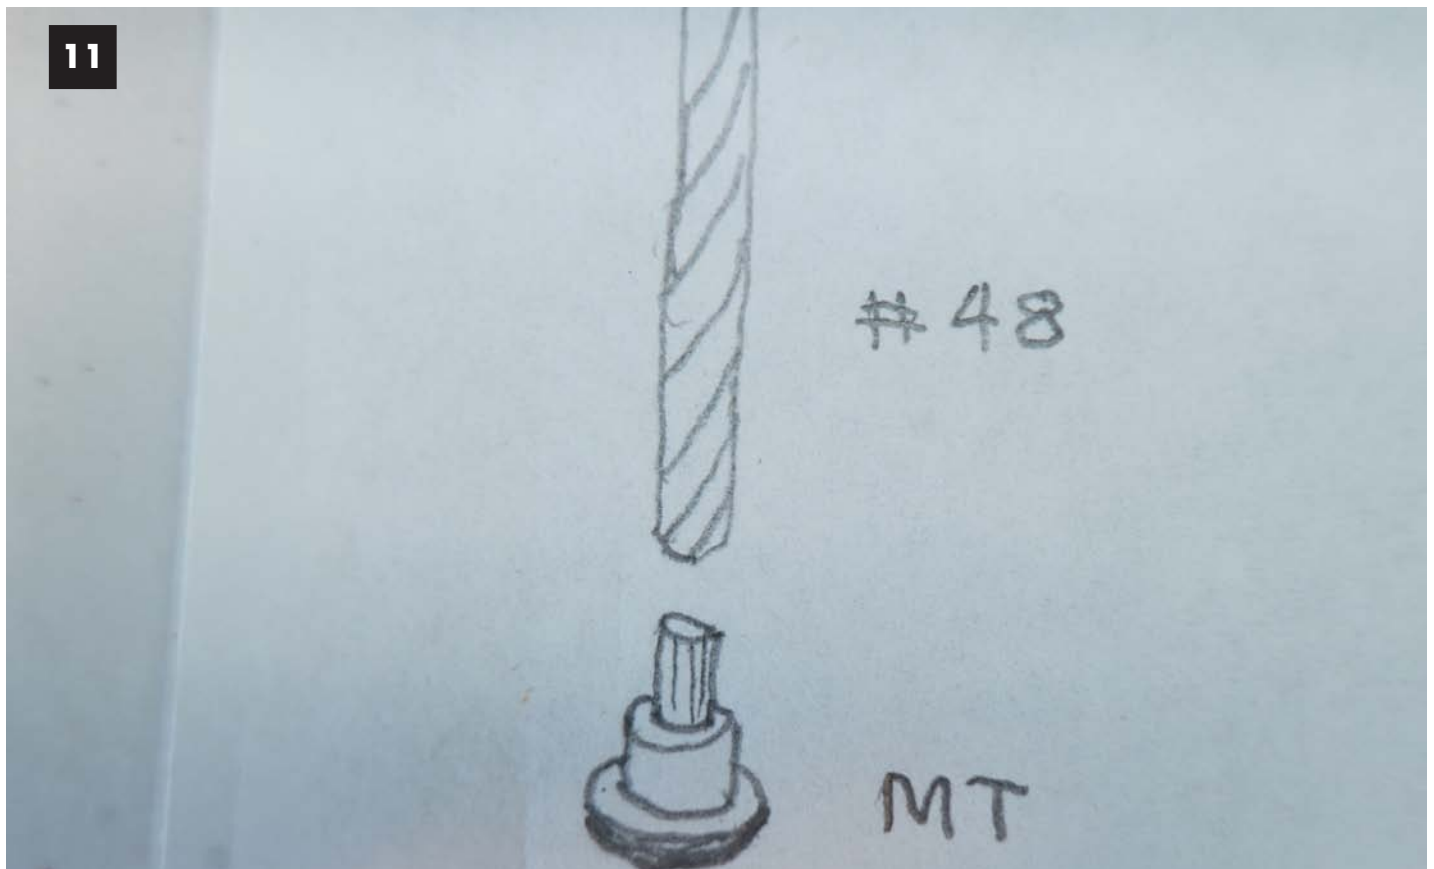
Reference drawing showing MTL Bolster pin and #48 (.070) drill for bolster pin shoulder.
